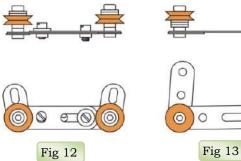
Build the first pulley support from two Slotted Strips with the lower Strip hard against a Fishplate to set the distance between the Pulleys. Hex head Pivot Bolts are used here, but Threaded Pins can be used instead, with just enough room on top of the pulleys for retaining collars.
